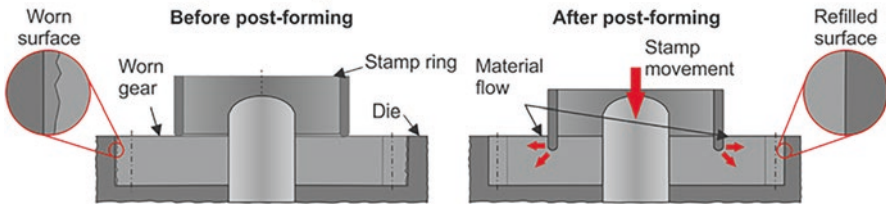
Forming strategy for the re-manufacturing of spur gears [10]
